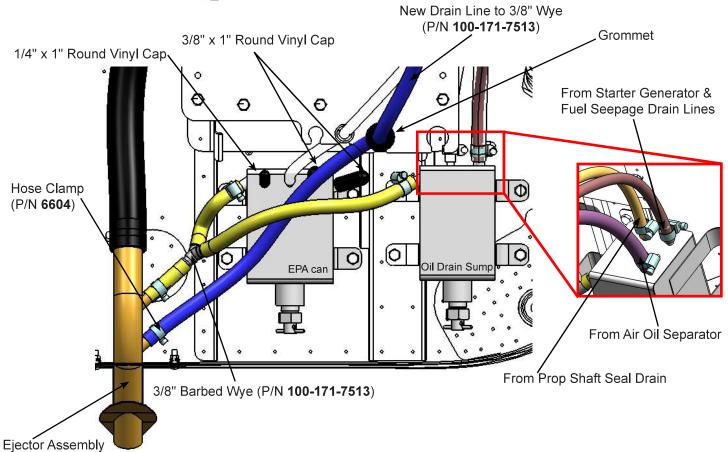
Detail D: EPA can/Oil Drain Sump Drain Line Modification
